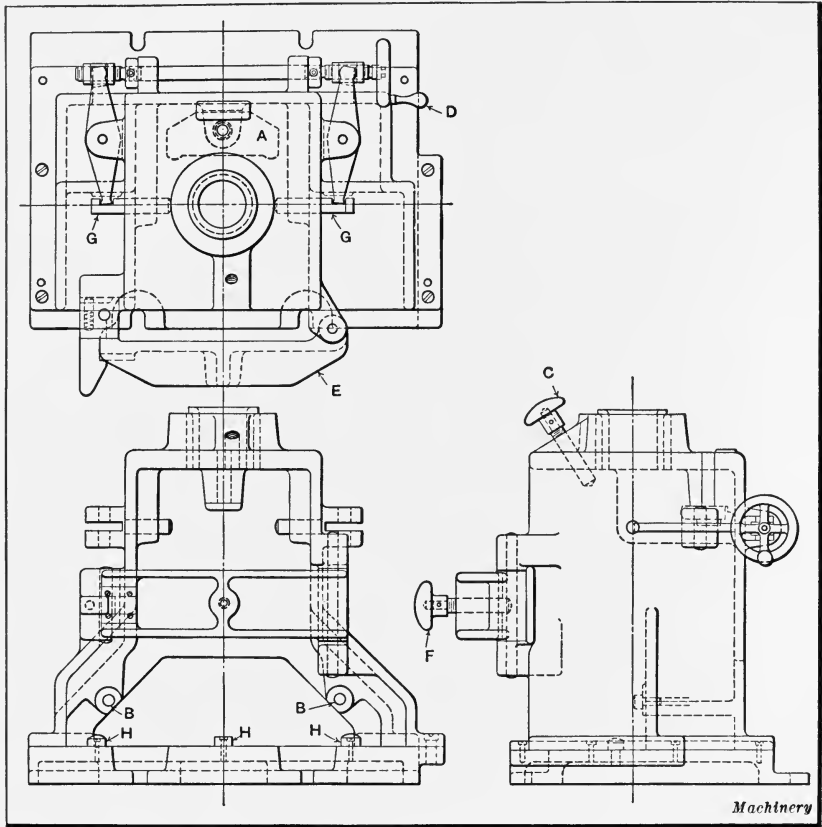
Assembly Drawing of Jig illustrated in Figs. 17 and 18
